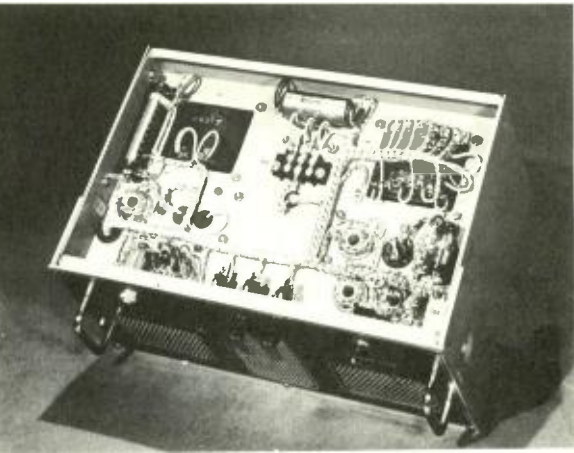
Example of wiring showing the use of a cabled form or harness. (Courtesy E. R. P. Div'n, Western Electric Co.)
